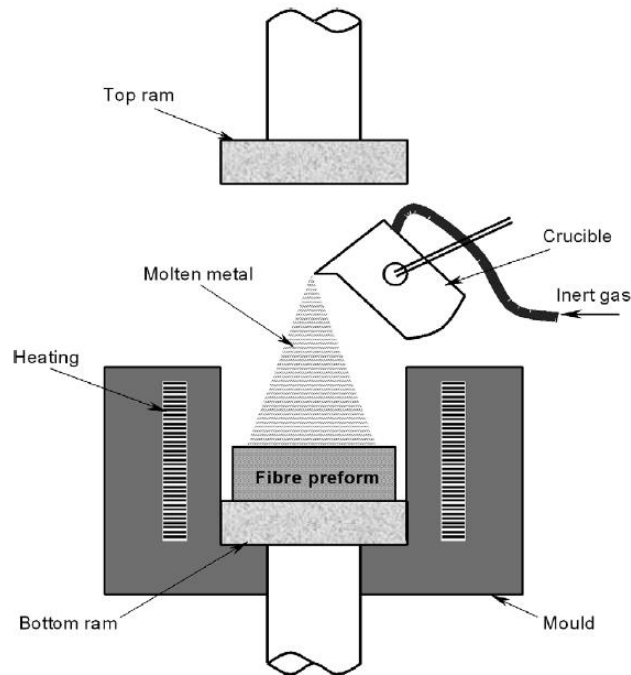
Schematic illustration of the squeeze casting process [2].
